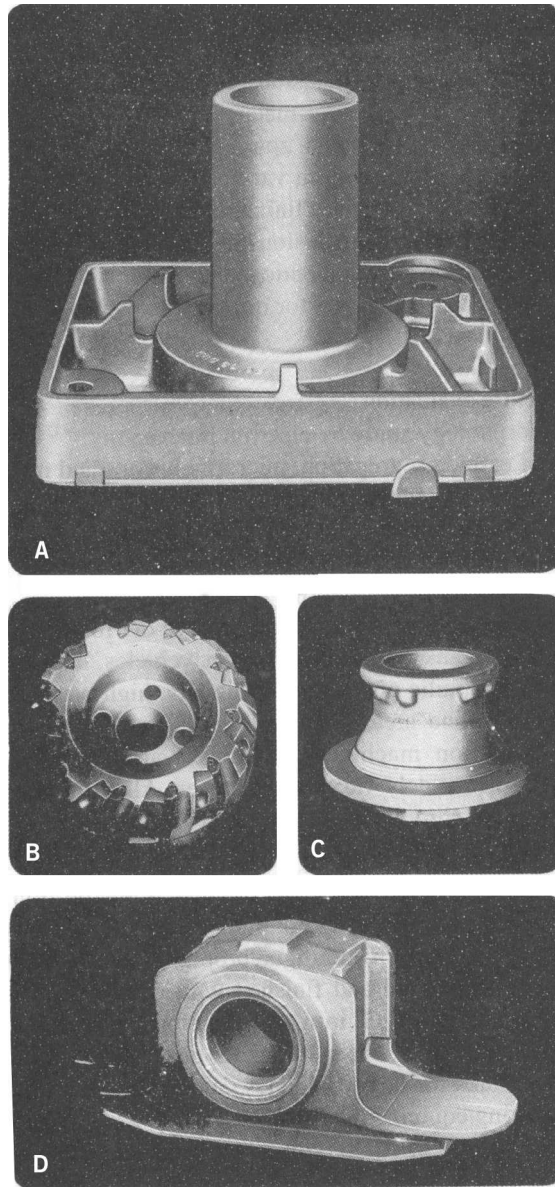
Spheroidal graphite cast iron castings (A) Jolting table, 613.0 kg (B) Cutter head, 6.5 kg (C) Reer-wheel hub, 23.0 kg (D) Rollar axle box, 92.0 kg
